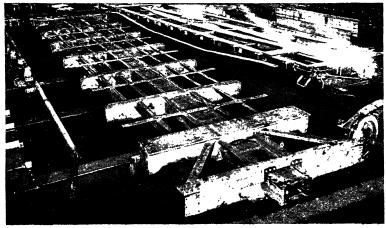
Welded railroad car underframe. (Bethlehem Steel Co.)
